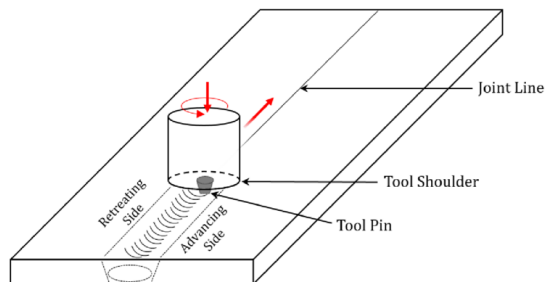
Schematic illustration of the Friction Stir Welding (FSW) process for butt joining of aluminium and steel plates. Copied from [50].
